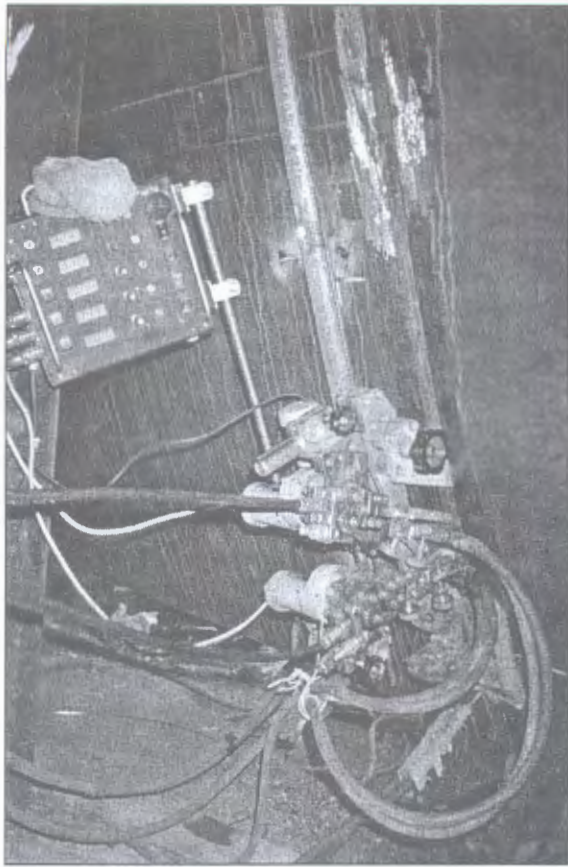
New two-electrode machine AD-381 for site electroslag welding of 30–60 mm thick metal
